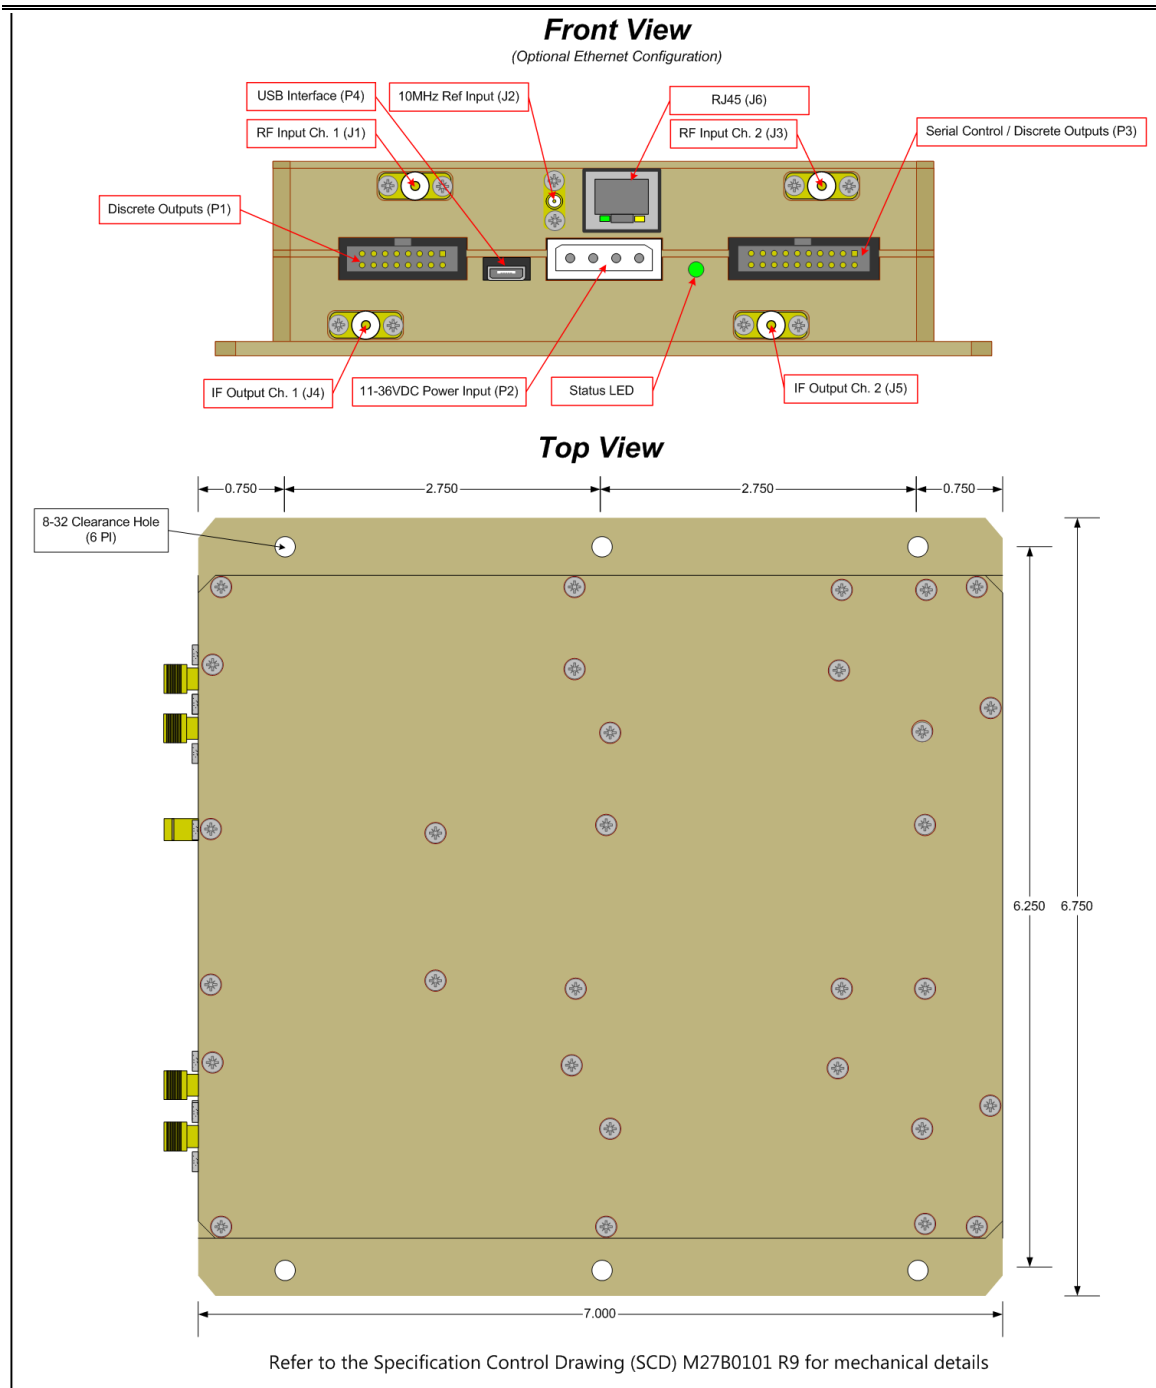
C LS27B Mechanical Outline Drawing – Flange Mount Option
